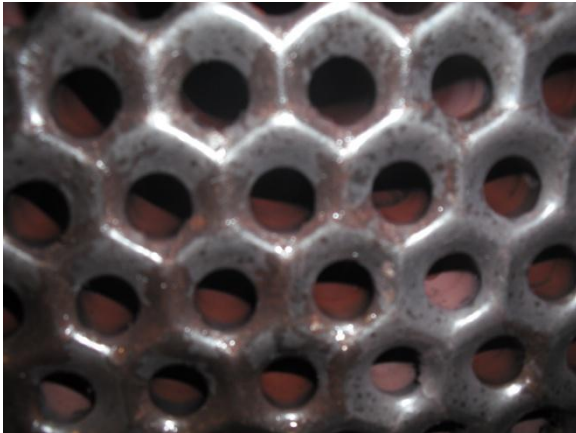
Wastage of Tube-to-tubesheet joint welds that can lead to joint leaks
